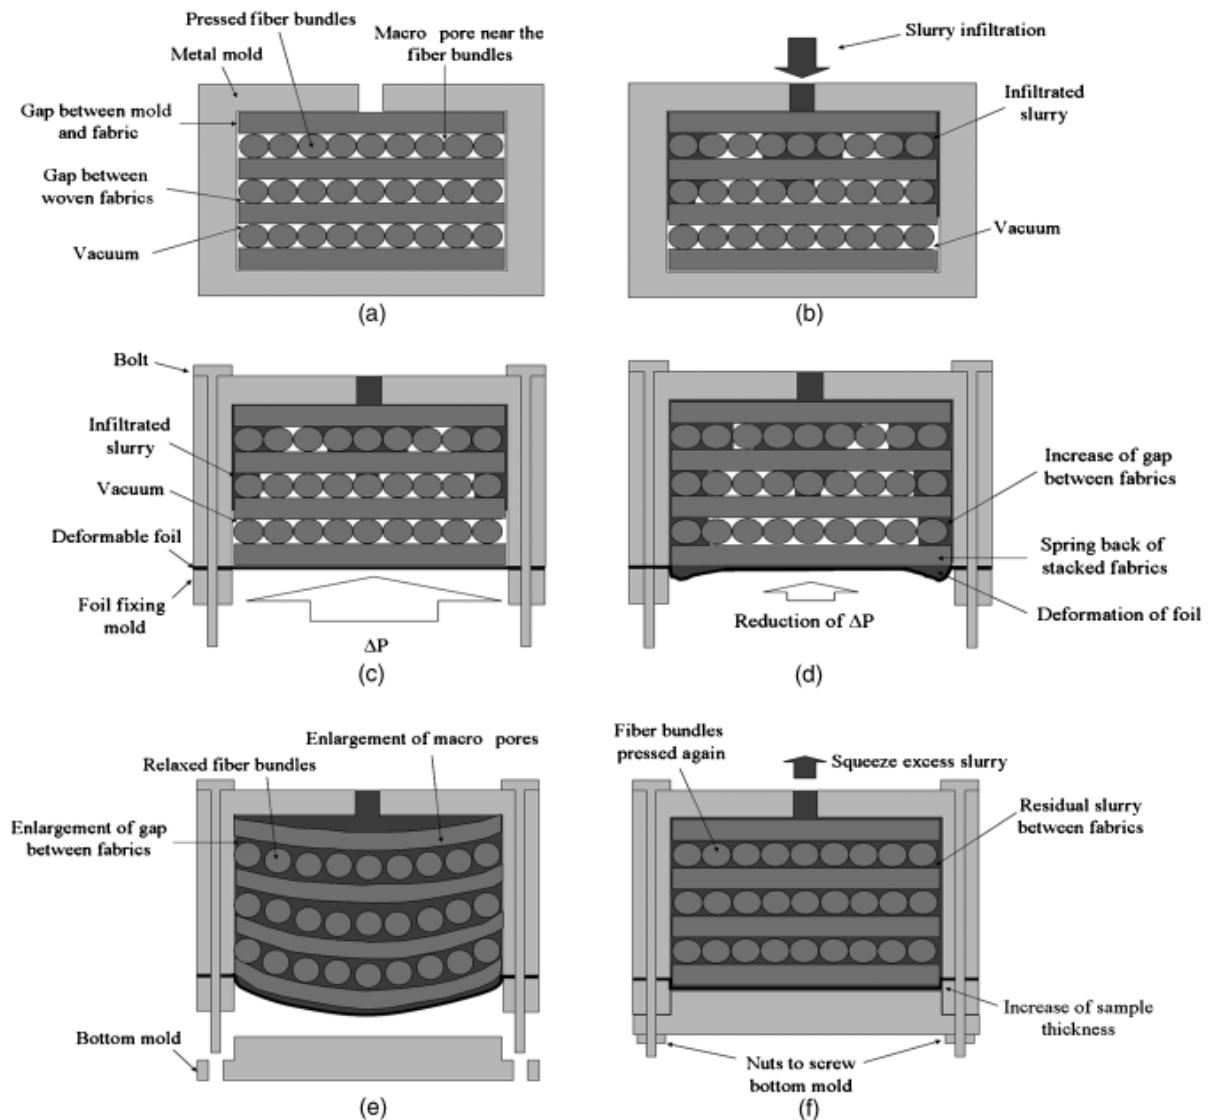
Schematics of moulds for conventional vacuum-assisted pressure casting and a new deformation process. (a, b) Conventional fixture of a firm mould. Woven fabric suppress the infiltration of slurry. (c) Mould with a deformable foil during initial infiltration. The fabrics are pressed by the difference of pressure (ΔP) inside and outside of the mould. (d) Onset of outward deformation of the foil by the slurry. (e) Completion of the full deformation and infiltration of the slurry. (f) Removal of excess slurry by squeezing the mould: reprinted with permission from John Wiley and Sons, *J. Am. Ceram. Soc.* 90, (2007) Fig.1 in p. 2658 [258].
